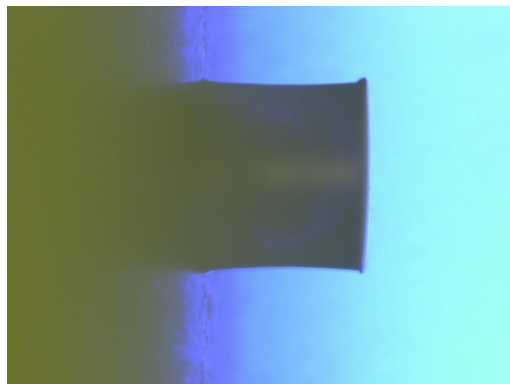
molded prints of shape 1) and 2) of a 300µm hole
